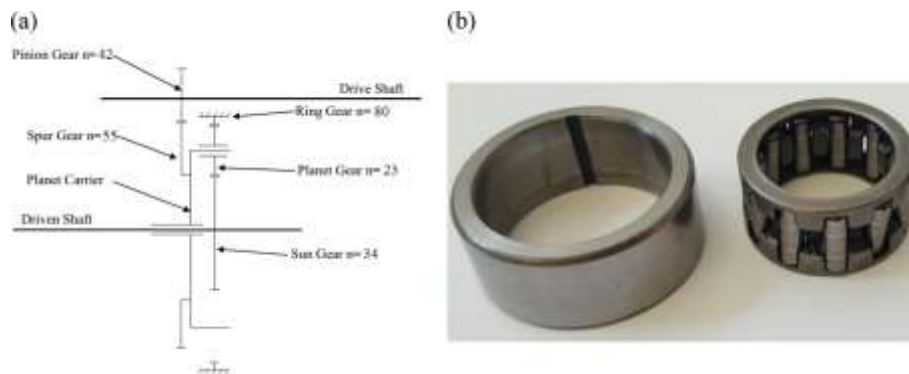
(a) Diagram of the UNSW planetary gearbox test rig and (b) planetary bearing with seeded fault [20].
